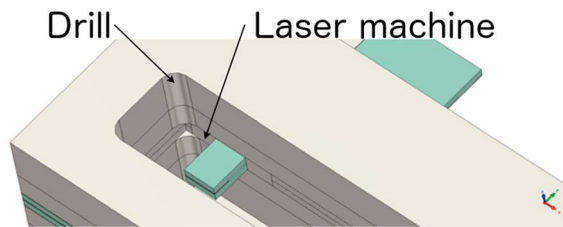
Perspective view of the CST model. Rounded corners have been considered for the drilled PCB, and square corners for the central PCB have been manufactured with a laser machine.
